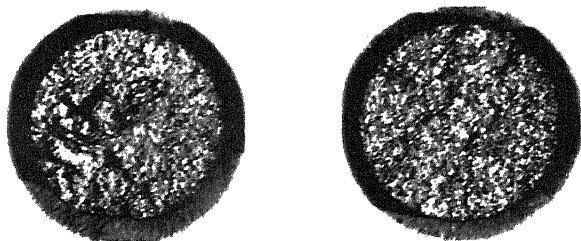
TEST-BAR FRACTURES, MUZZLE AND BREECH OF FORGING 1348 UNTREATED.
